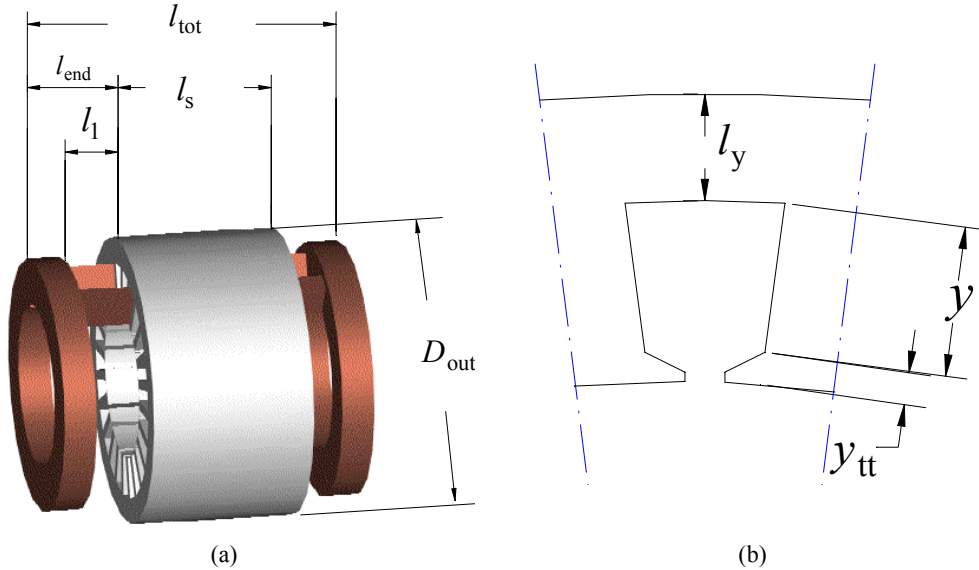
(a) Definitions for the external dimensions of a radial-flux machine. (b) Definitions for the slot dimensions.
